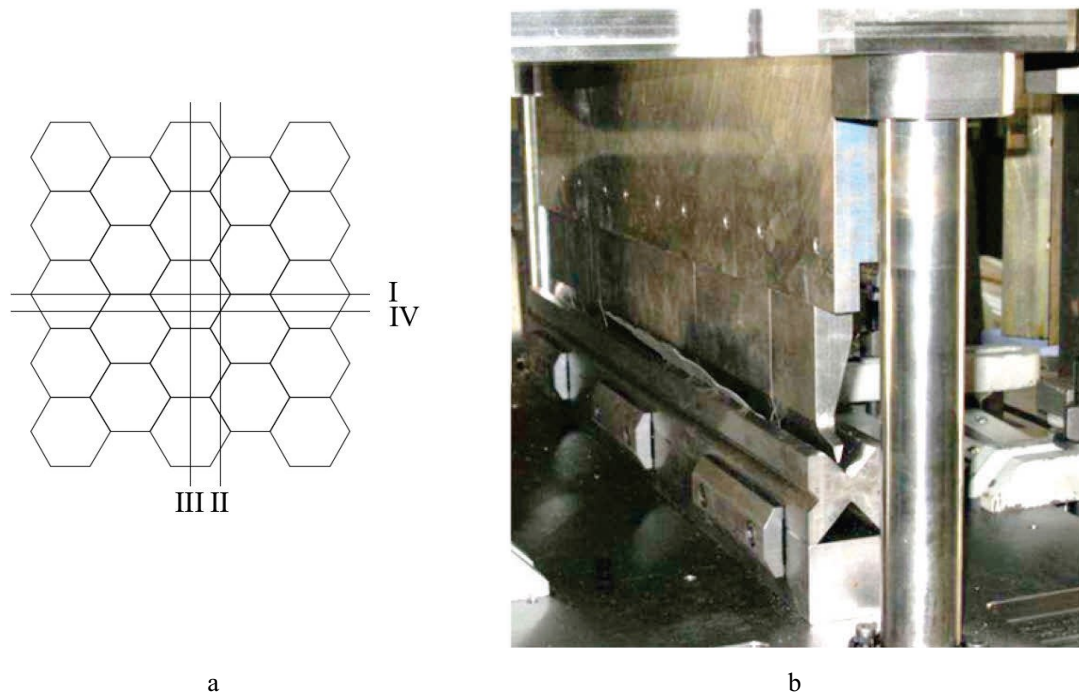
4 bending positions (a) and used bending press (b) [80]
